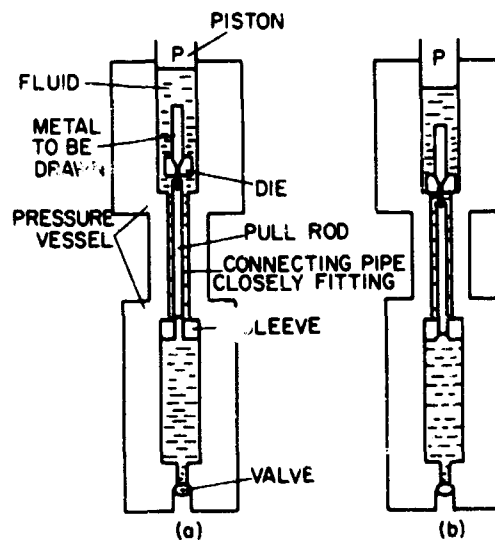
Sketch of apparatus for hydrostatic wire drawing [99].
